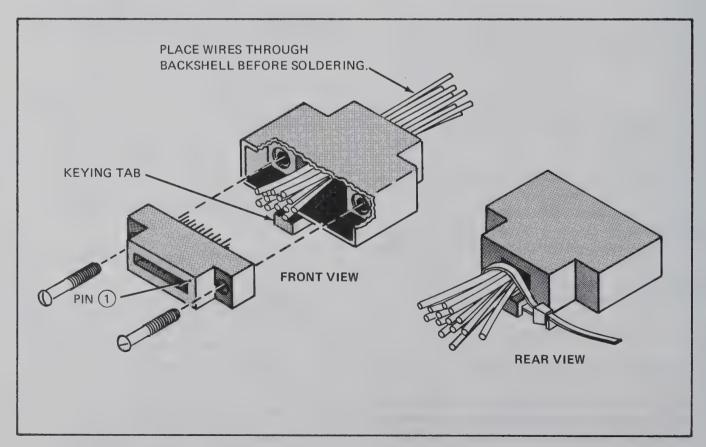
MATING CONNECTOR END OF THE DPOU INTERFACE CABLE
